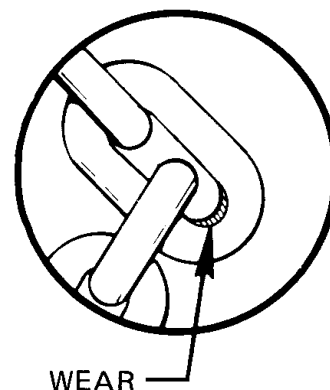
Check Chain Wear at Bearing Surfaces Between Links
